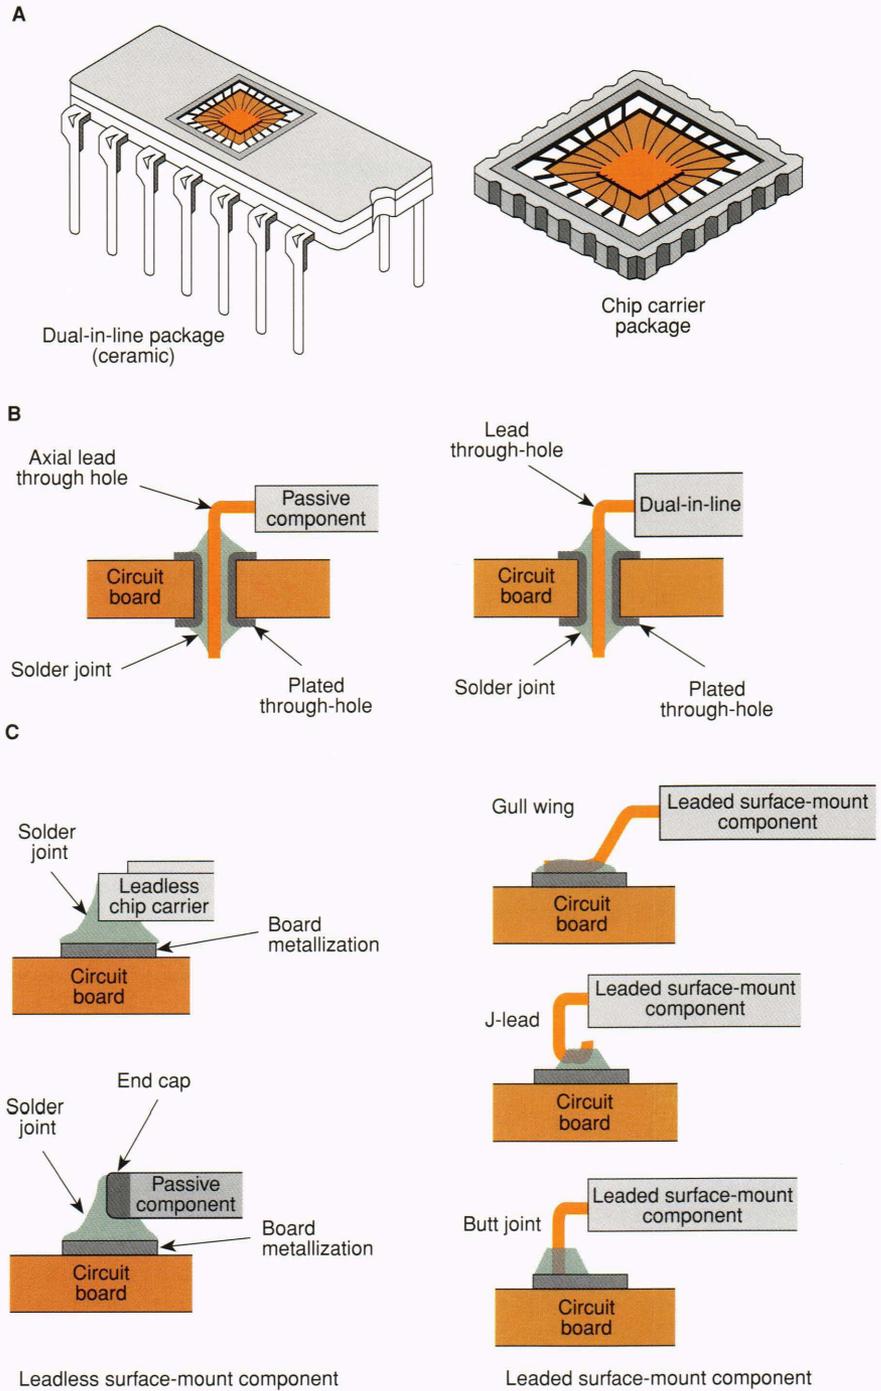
Package and package-mounting concepts. A. Common through-hole (dual-in-line) and surface mount (chip carrier) packages. B. Through-hole mounting. C. Various types of surface-mounting schemes.
